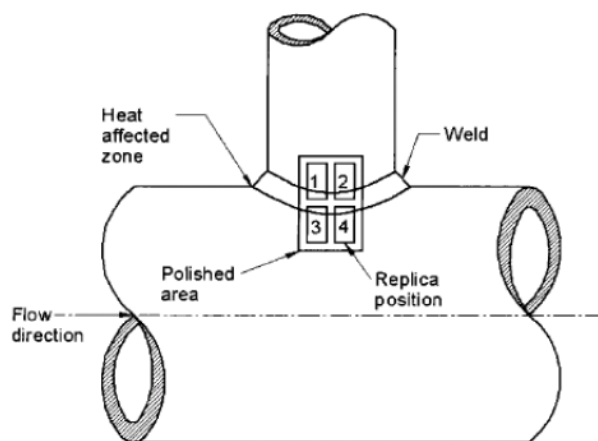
Replica position on flank side of a branch/attachment weld. Note: If the branch or stub is less than 15mm thick, only do pipe side replicas (#3 and #4).
